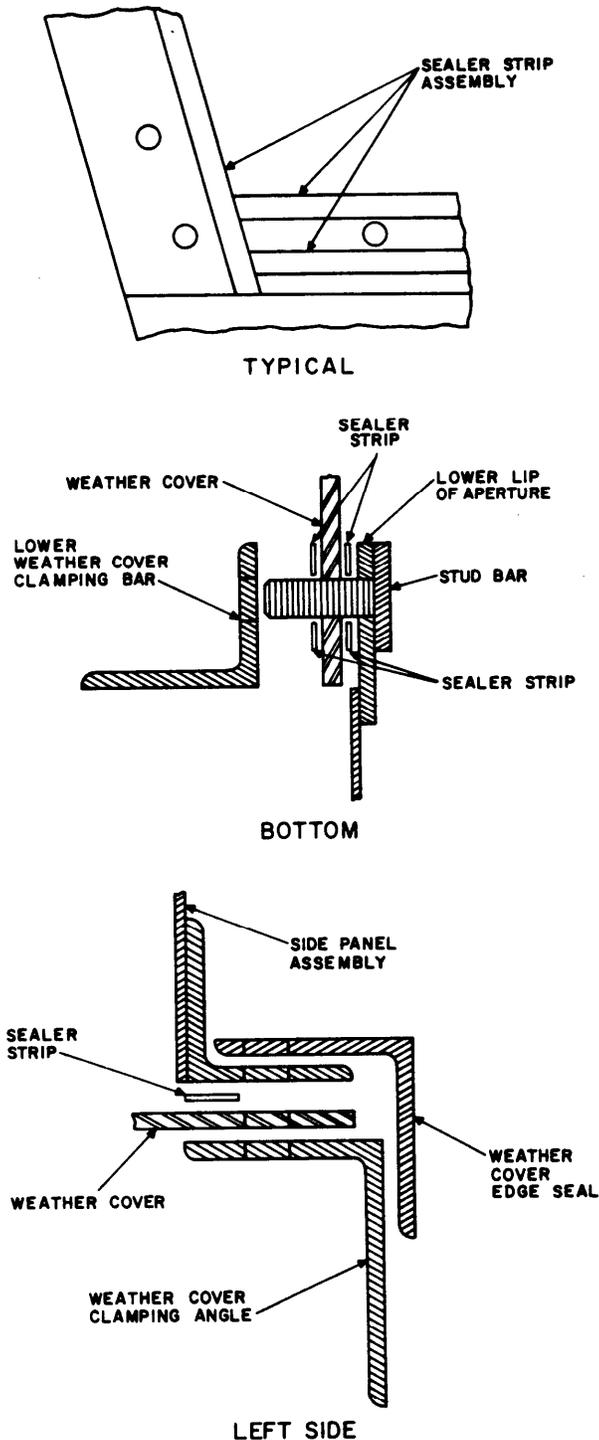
Location of Sealer Strip Assembly for Weather Cover
